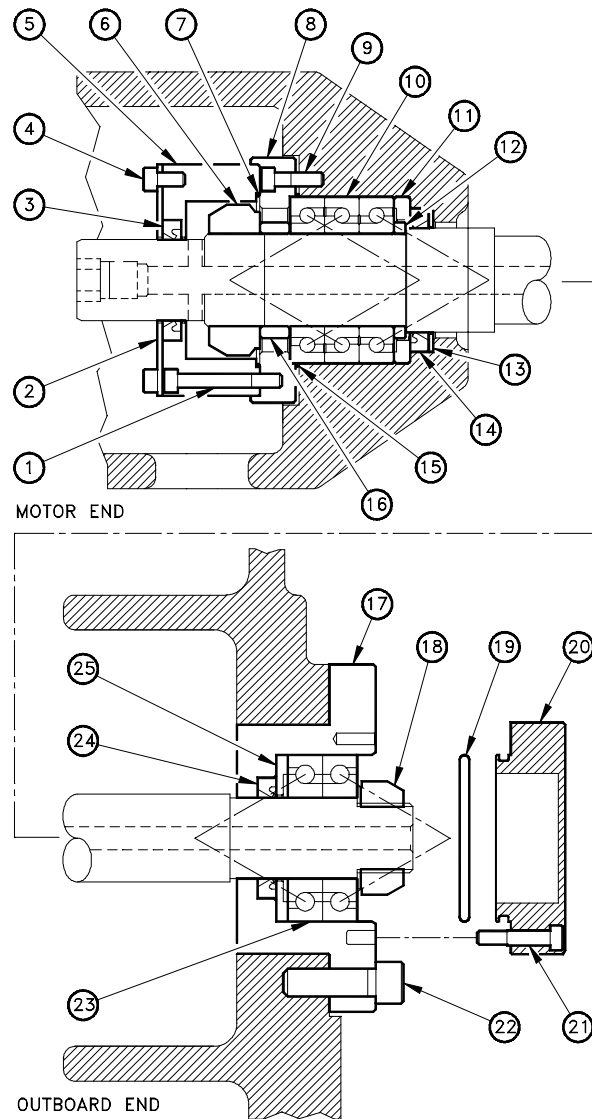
INSTALLATION OF BALL SCREW MOUNTING COMPONENTS
